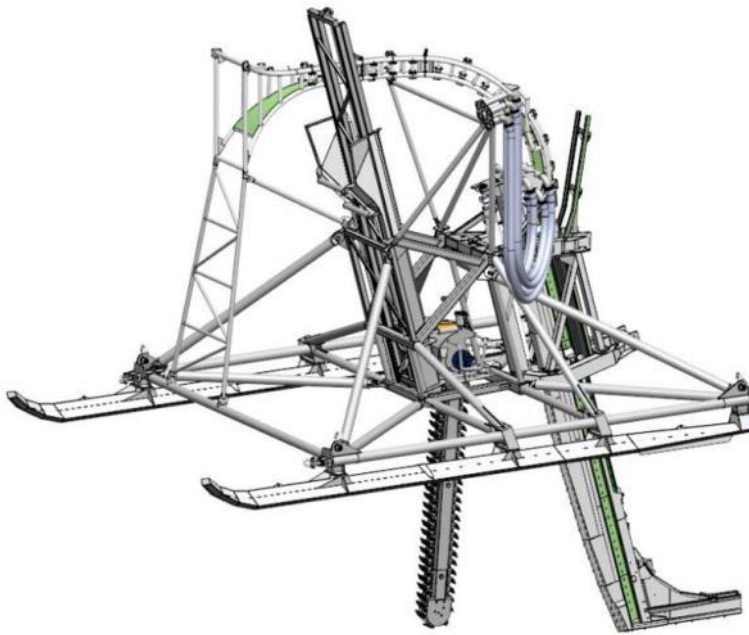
BSS3 jet sledge trencher with a mounted chain cutter in front of the cable stinger
